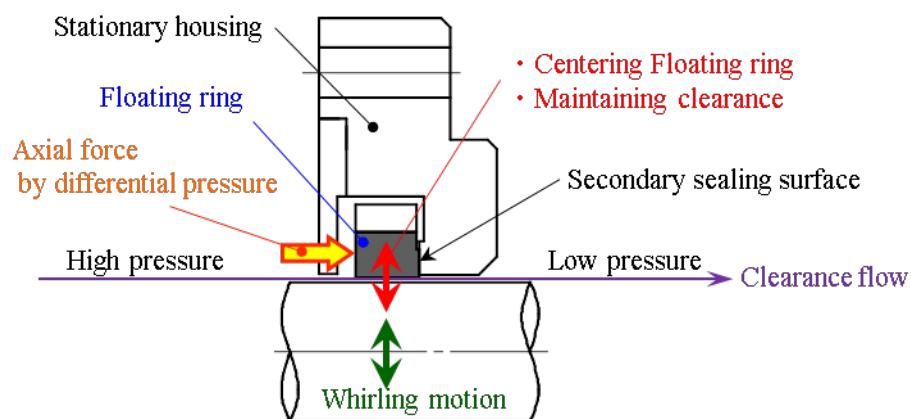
FRS sealing mechanism, primary sealing surface (noncontact type), secondary sealing surface (contact type)
